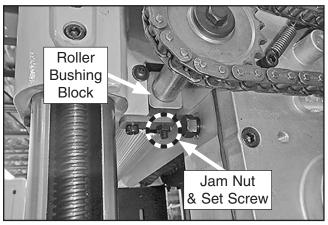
Example of infeed roller bushing block and height adjustment controls.
